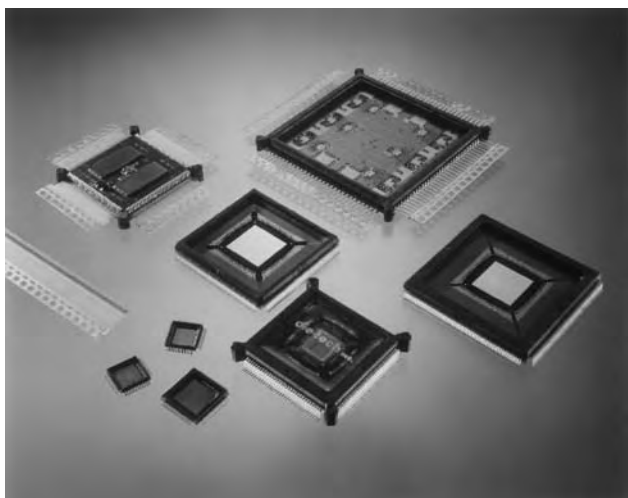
Complex surface mount packages that contain smaller surface mount devices. (Courtesy of Die Tech, Inc.)
